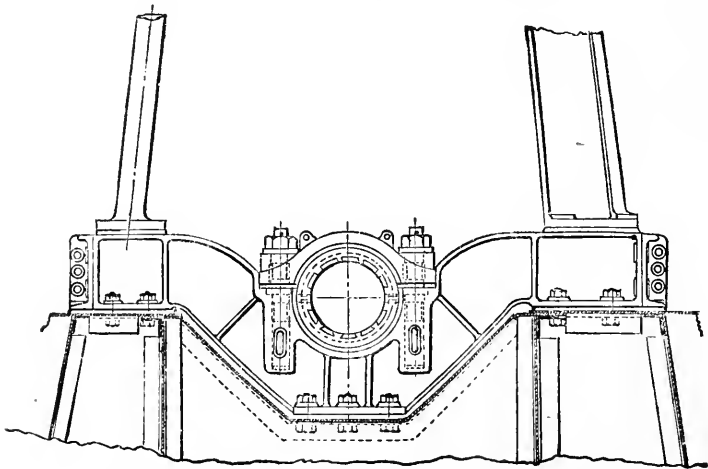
Cast-steel Main Bearing Frame for Naval Engines.
